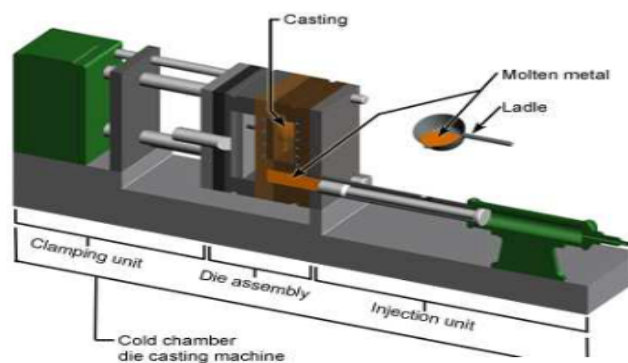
Injection Machine with cold chamber and horizontal movement piston in Graphic View [28]
